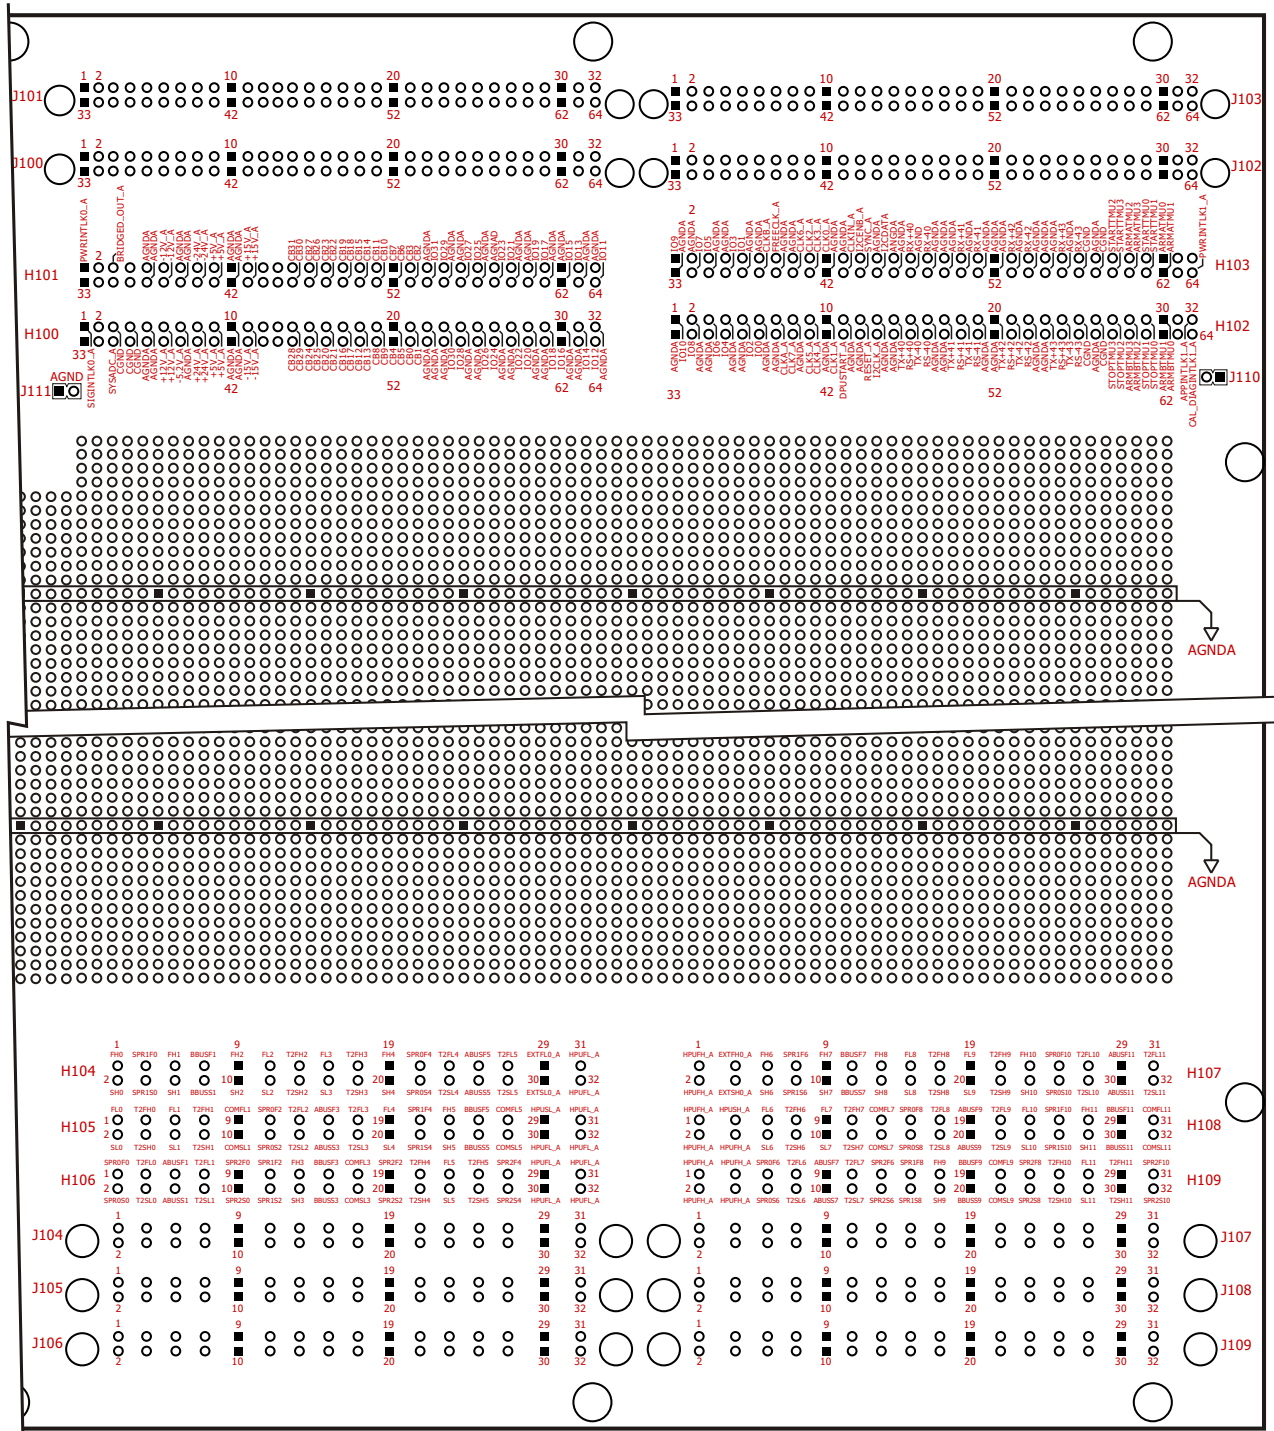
Application Board Layout (Bridged - Right Side)
